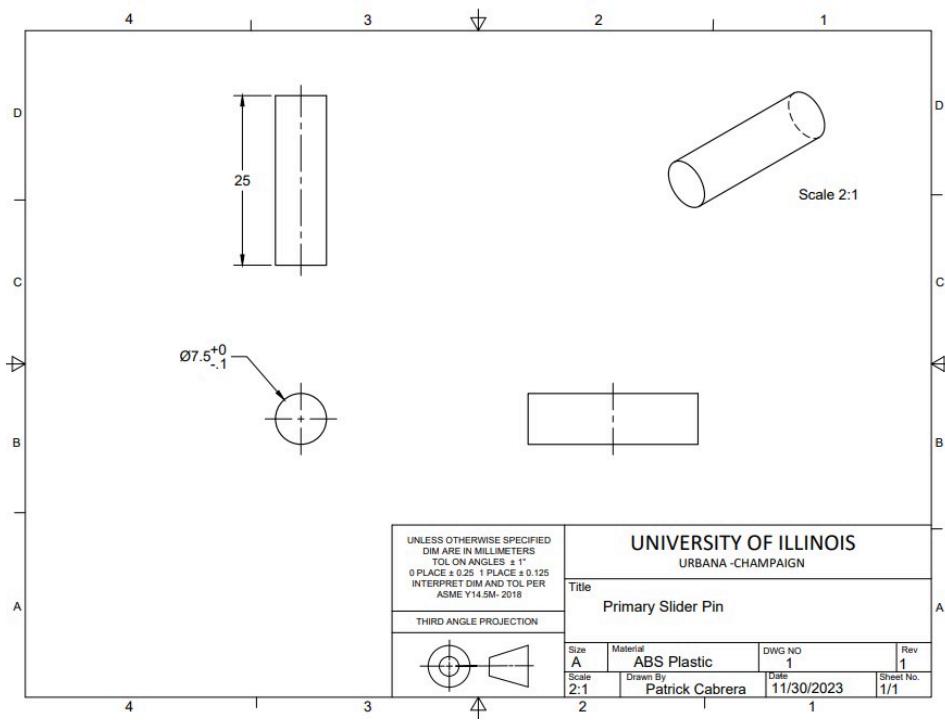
Primary Slider Pin Part Dimensioned Drawing
